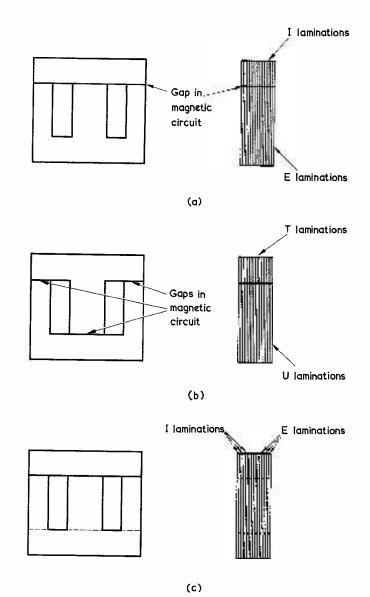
(a). Output transformer laminations in a butt-jointed assembly
